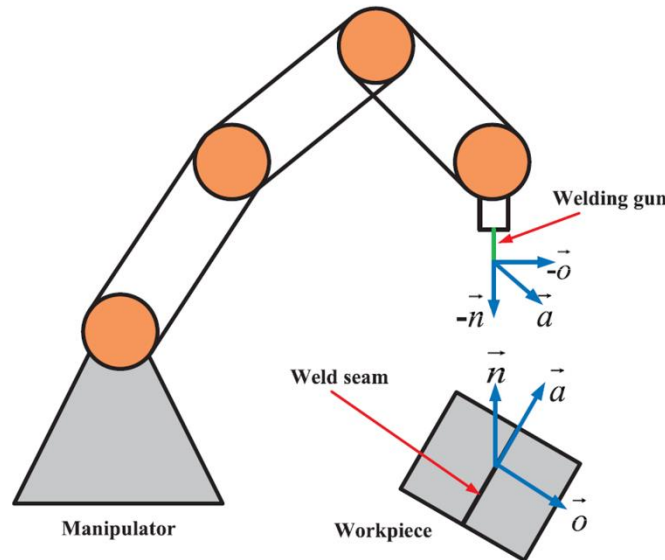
A schematic of seam pose and the pose welding gun.
